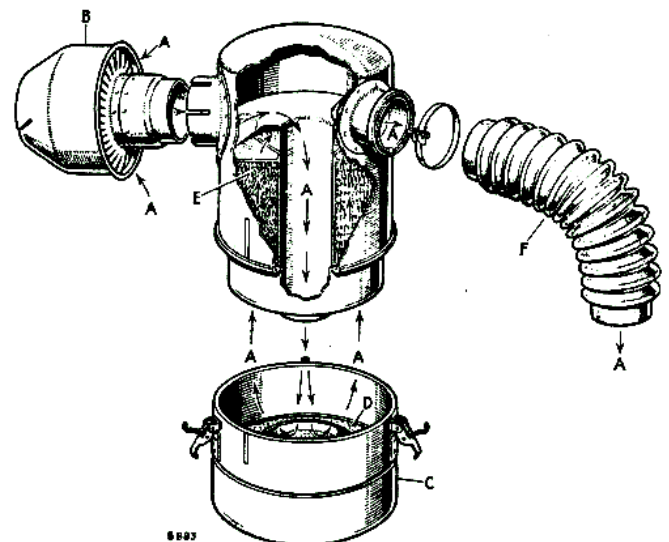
Sectioned view of air cleaner, 1954 models.
